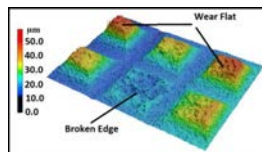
Wear and breakage of the edges of fine patterned PCD tool
